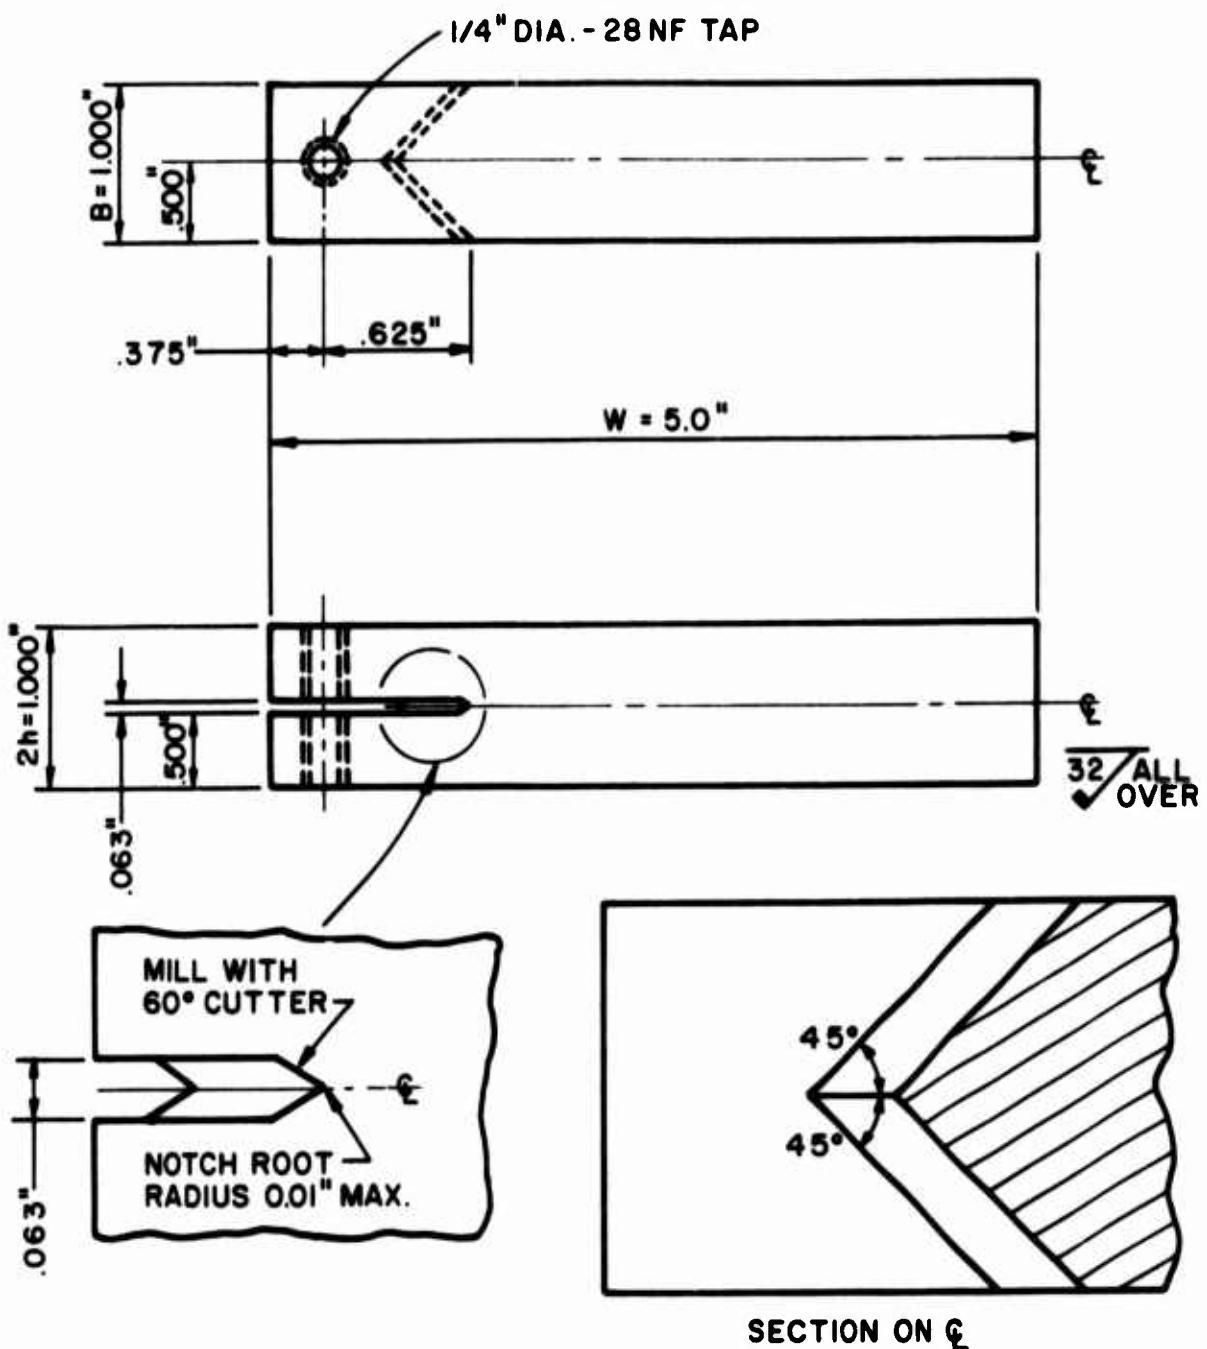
CONFIGURATION OF DOUBLE CANTILEVER BEAM (DCB) SPECIMEN USED FOR SCC TESTS
